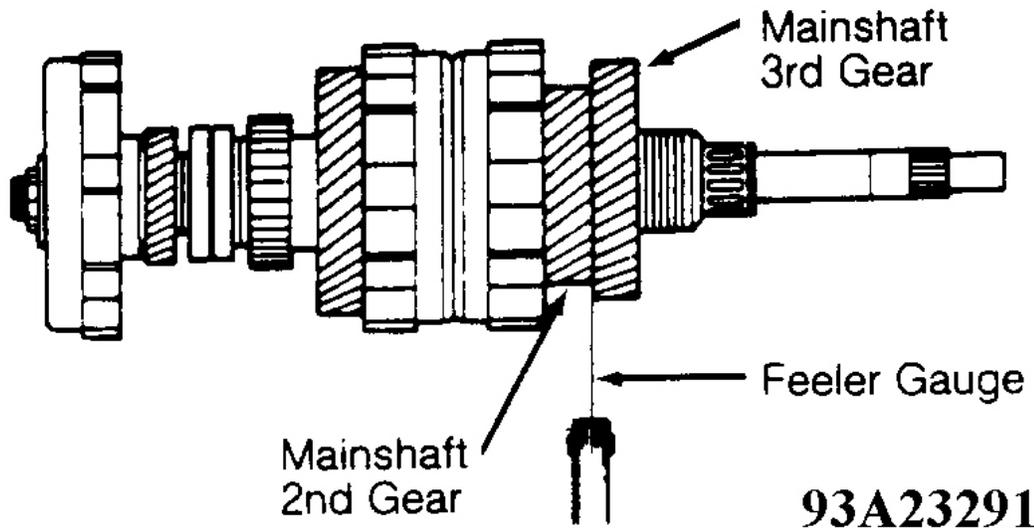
Checking Mainshaft 2nd-3rd Gear Clearance
